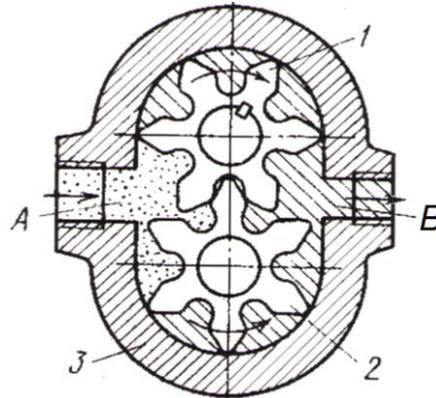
Scheme of gear pump: 1, 2 – gears; 3 – case
